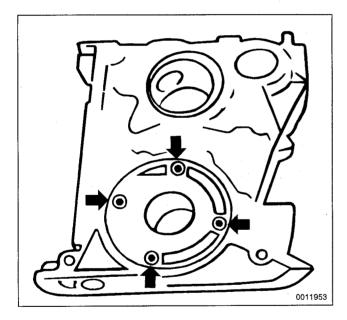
Oil pump cover mounting bolts (arrows) on M44 engine.
